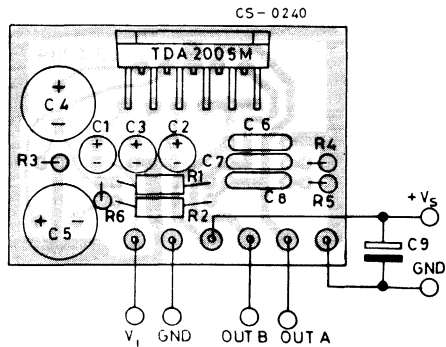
P.C. board and component layout of the circuit of Fig. 23 (1 : 1 scale)
